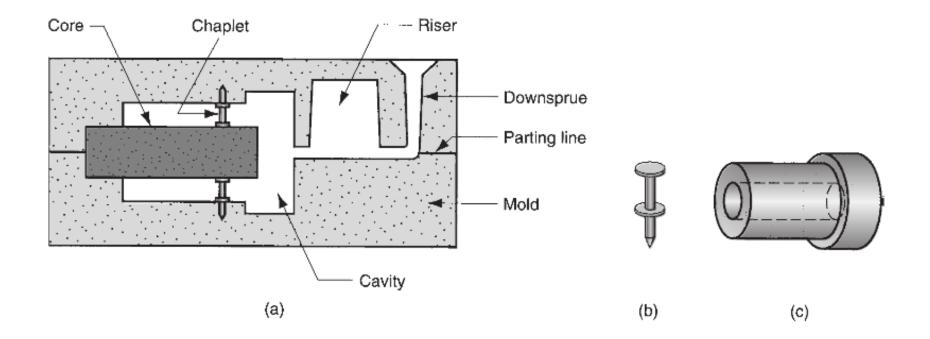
(a) Core held in place in the mold cavity by chaplets, (b) possible chaplet design, and (c) casting with internal cavity
